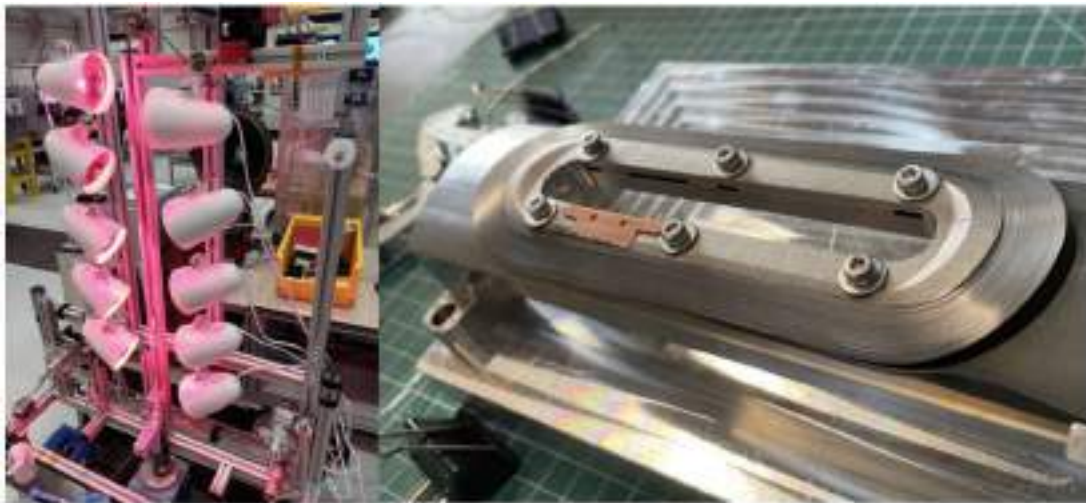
Left: The coating station, with the uncoated tape-spool on the left and coated tape spool on the right. The coating occurs near the bottom of the setup, after which the tape is heated to be dried before re-spooling. Right: one CT sextupole coil wound using 4 mm coated dummy tape
